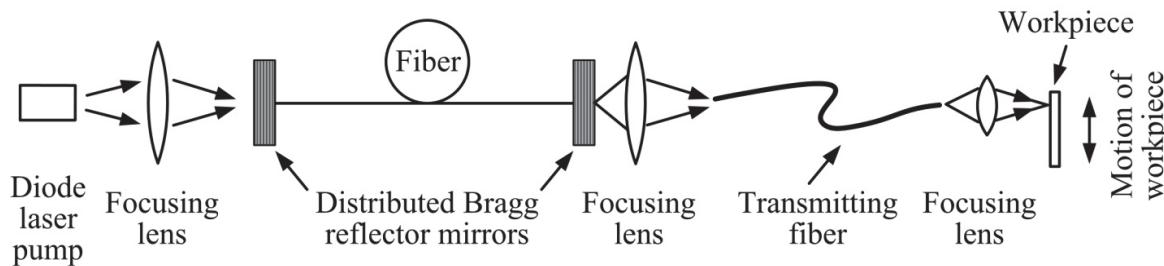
Typical arrangement for welding with a fiber laser
